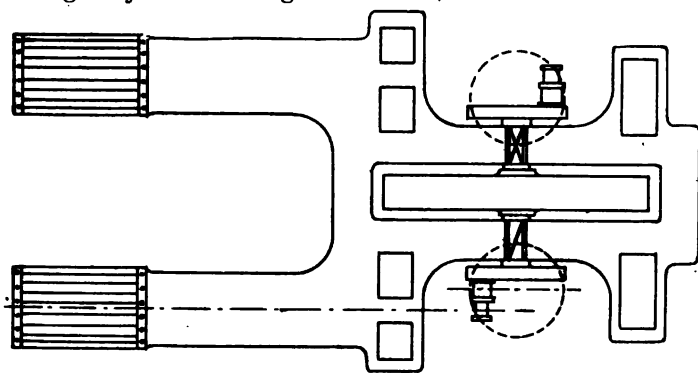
MACHINE WITH TWO BEARINGS AND CRANKS, ONE FLY-WHEEL.
